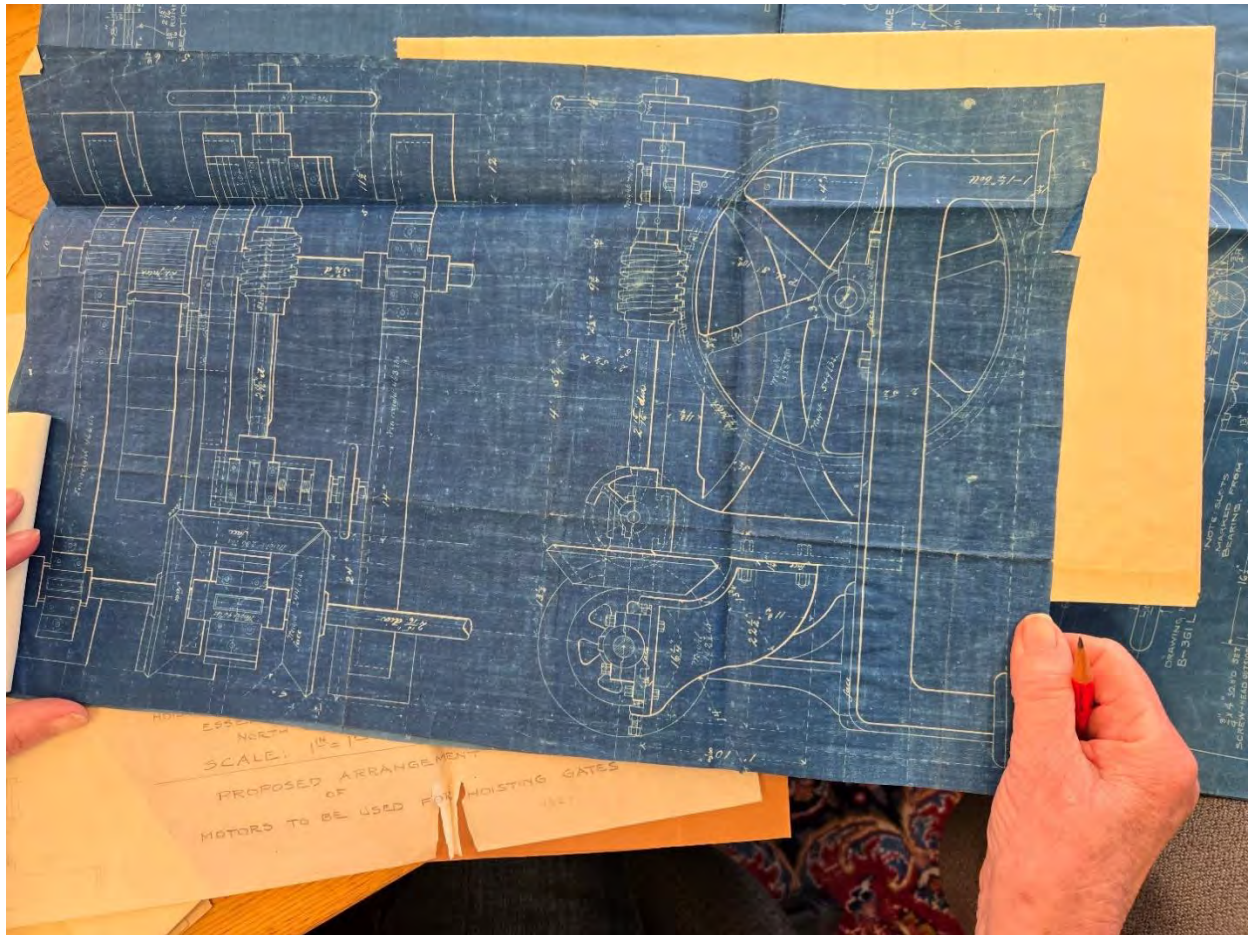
Detail of the South Canal Gatehouse hoisting equipment, view facing south.
